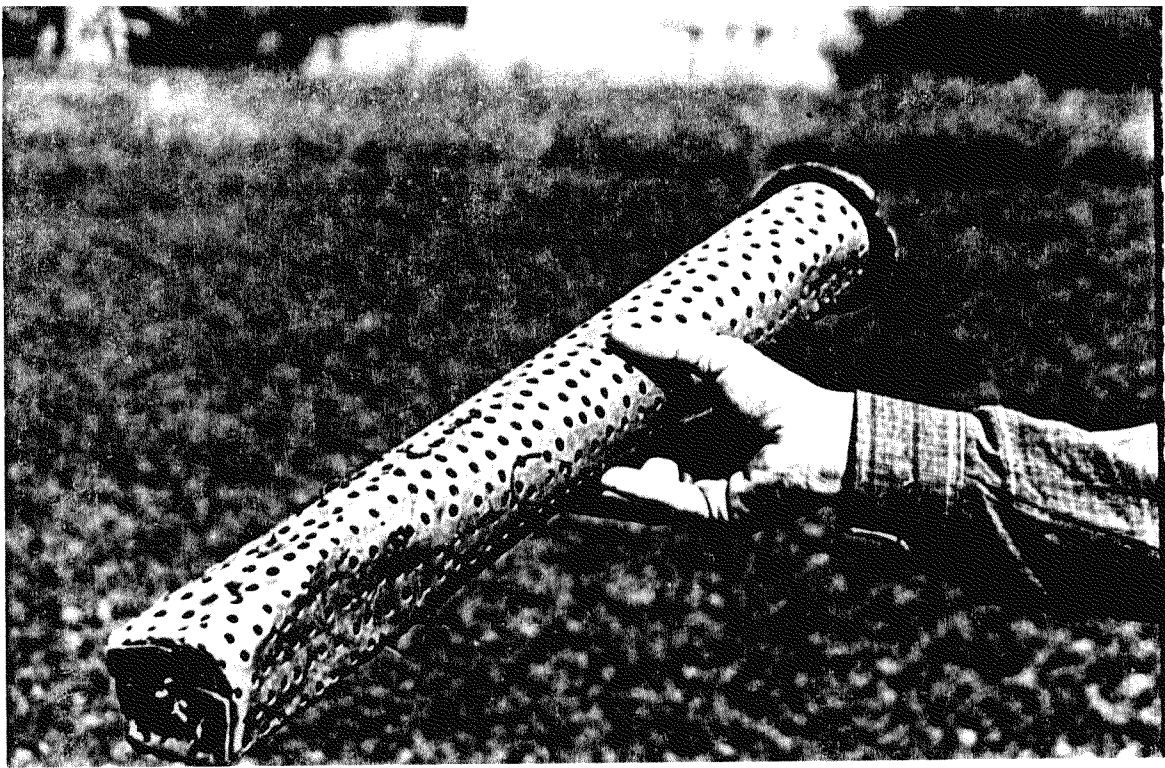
Making the End of the Screen by cutting the End of the Pipe into Strips and bending them inside
